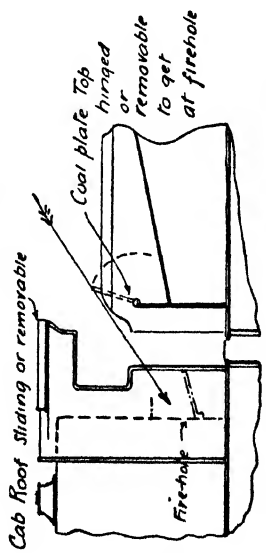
Arrangement of Cab so that Regulator, etc., is Accessible.
